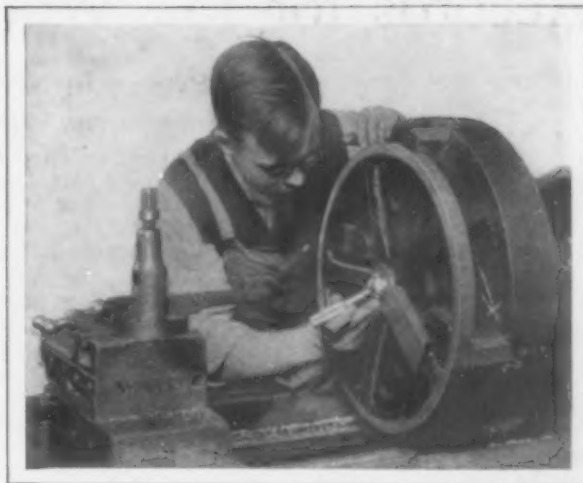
The Gauge in Use for Measuring Bored Holes in Lathe Work
